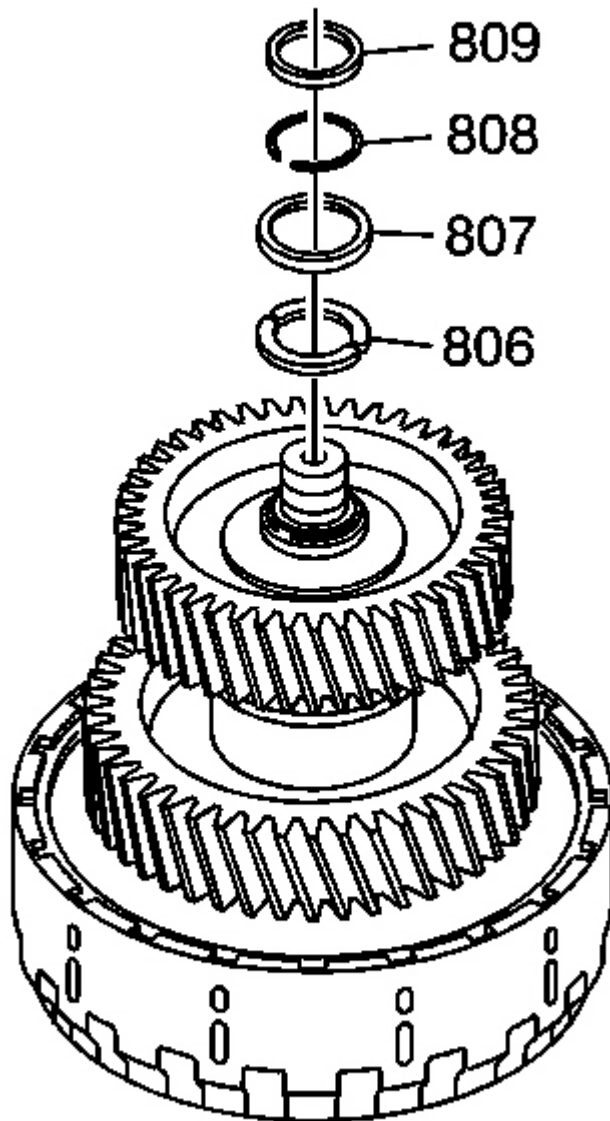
3rd Clutch Shaft Assembly & Components Removed
